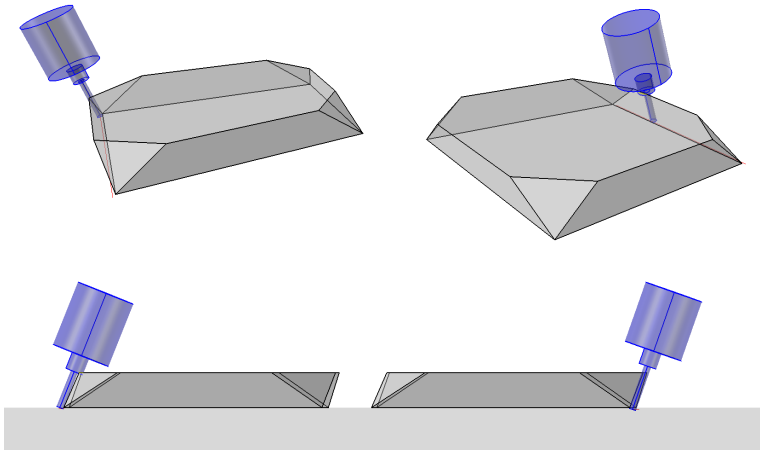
Contour cut using a flat tipped finger tool
